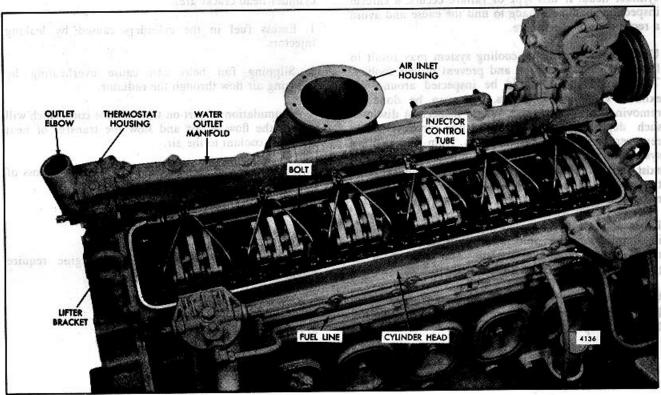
Typical Mounting of Cylinder Head 10-2-19
